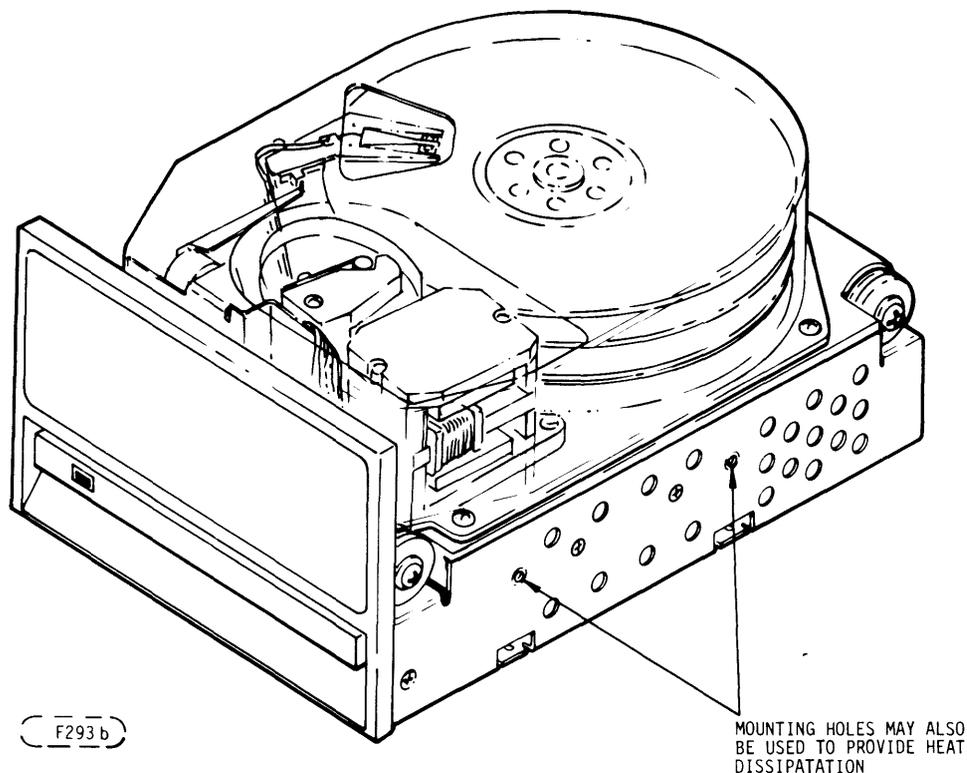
HEAT SINK MOUNTING HOLE LOCATION
